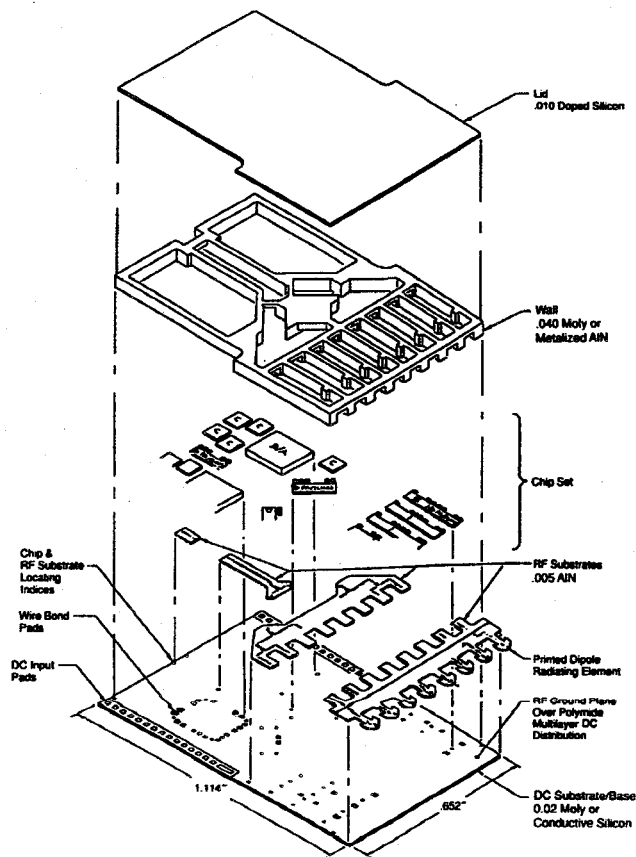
Exploded View of the Array-Module. A multi-layer DC distribution substrate serves as the base to which all other module components are mounted.
